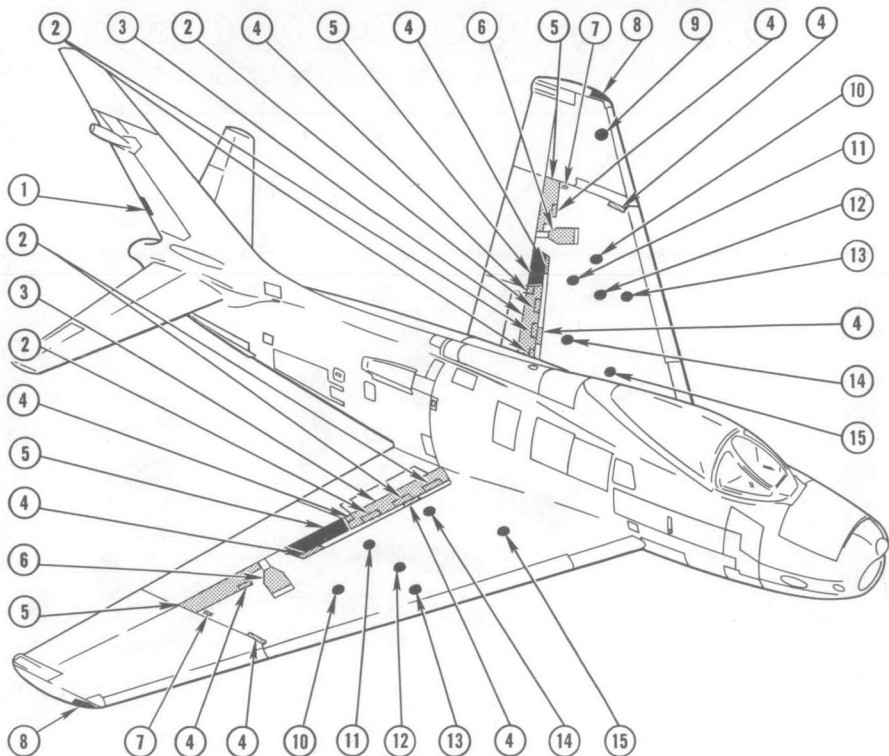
Access and Inspection Provisions (Sheet 3)
